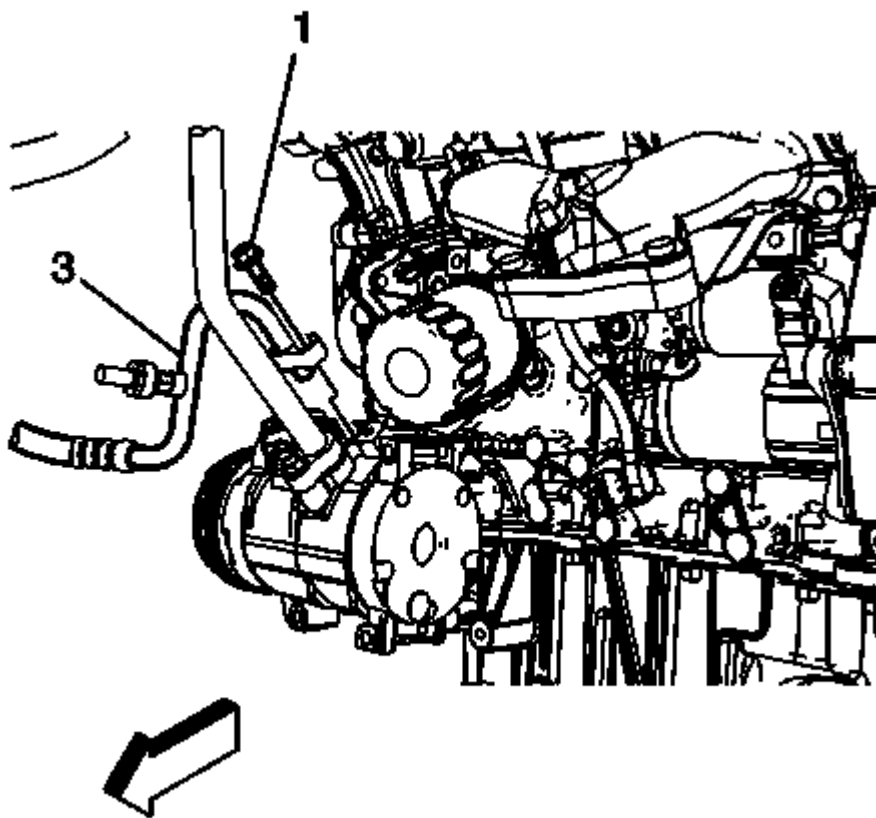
Identifying A/C Compressor Discharge Line & Bolt
